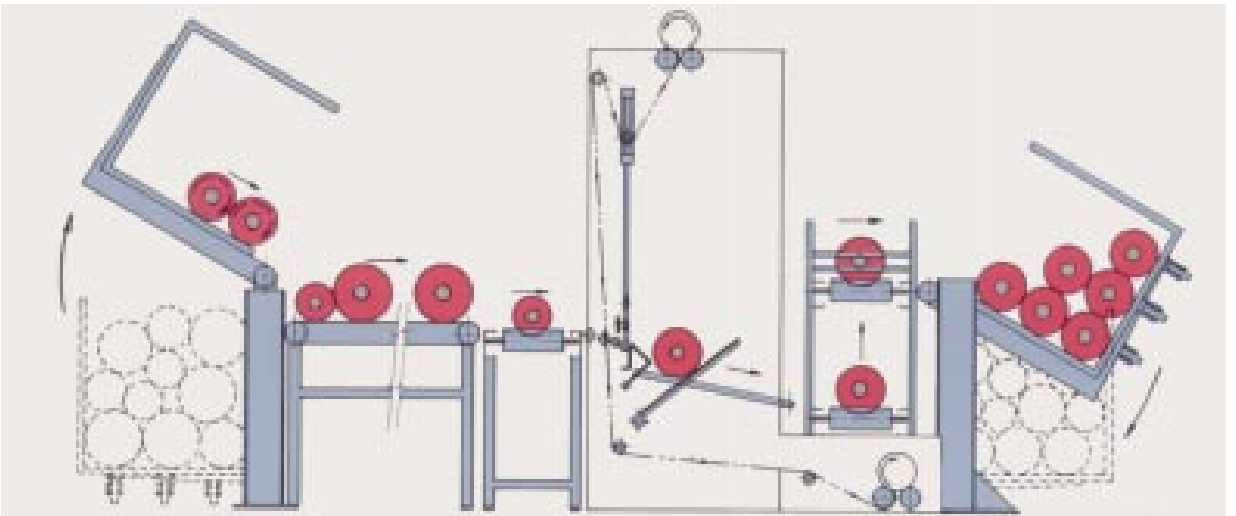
Welding rolls of woven fabric in film (Krantz).
